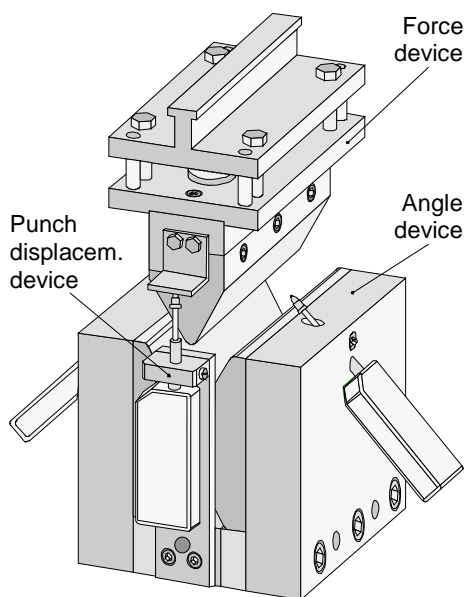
New flexible tool set-up for air bending with online measurement of punch displacement, bend angle, and punch force
